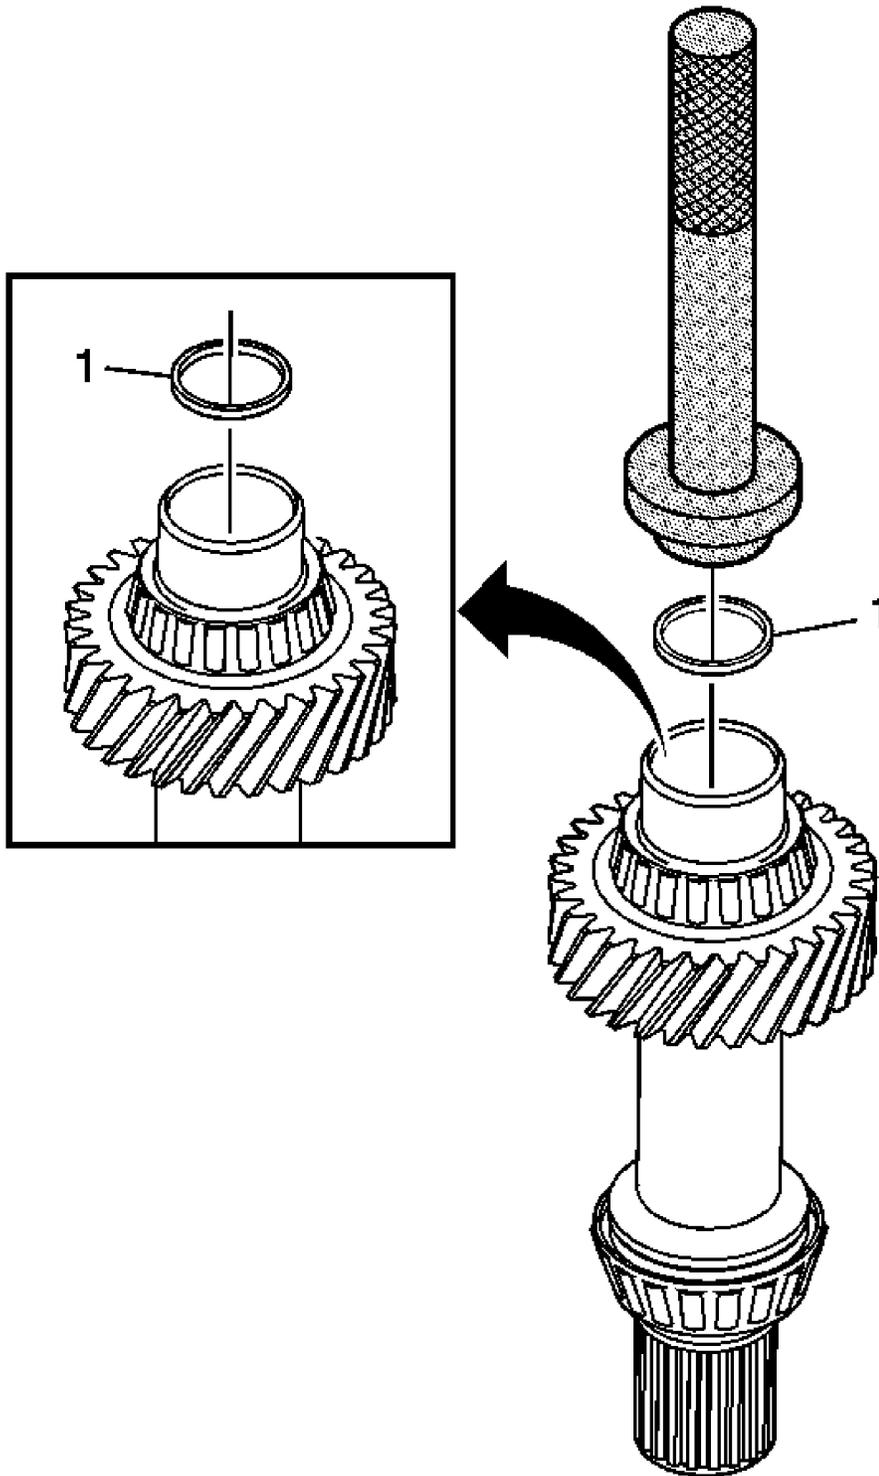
Locating Front Drive Axle Inner Shaft Seal
